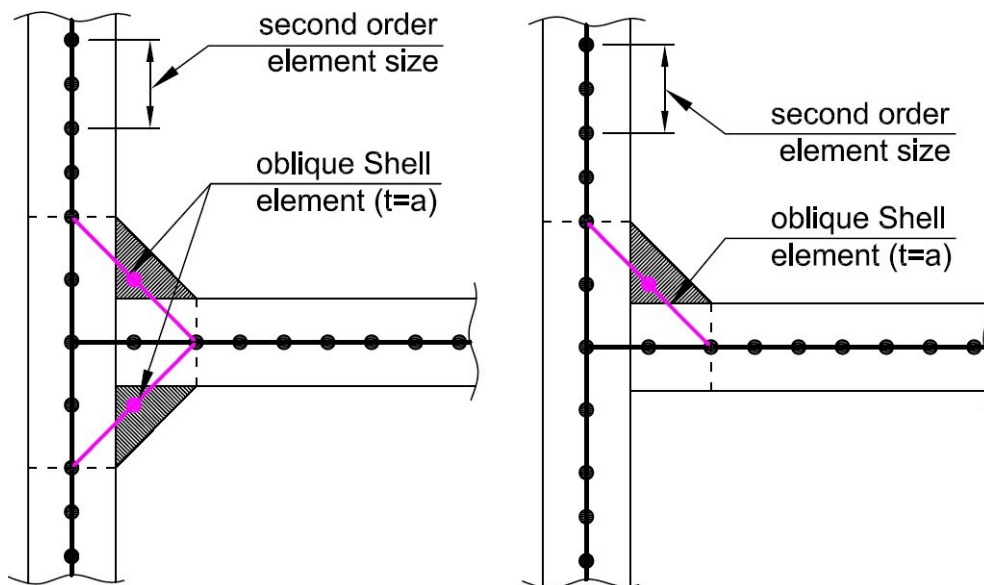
Weld modelling using oblique shell elements [89]
